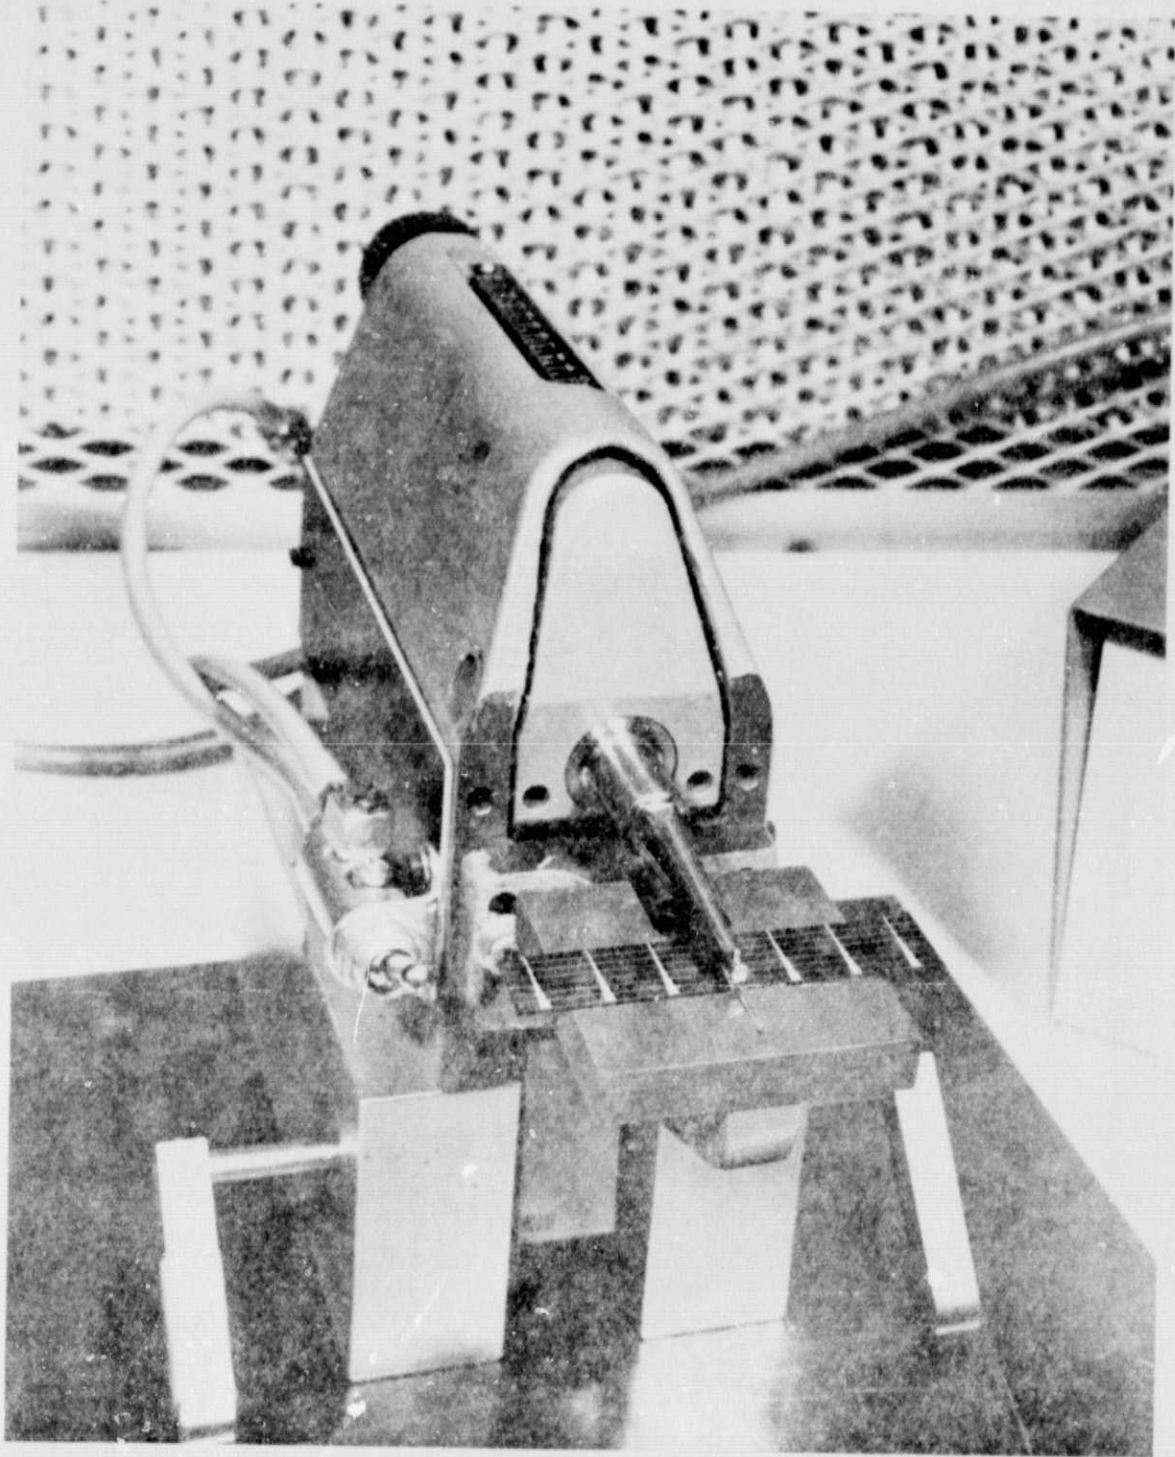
Sonobond Ultrasonic Weld Head (Model W-1060D)
